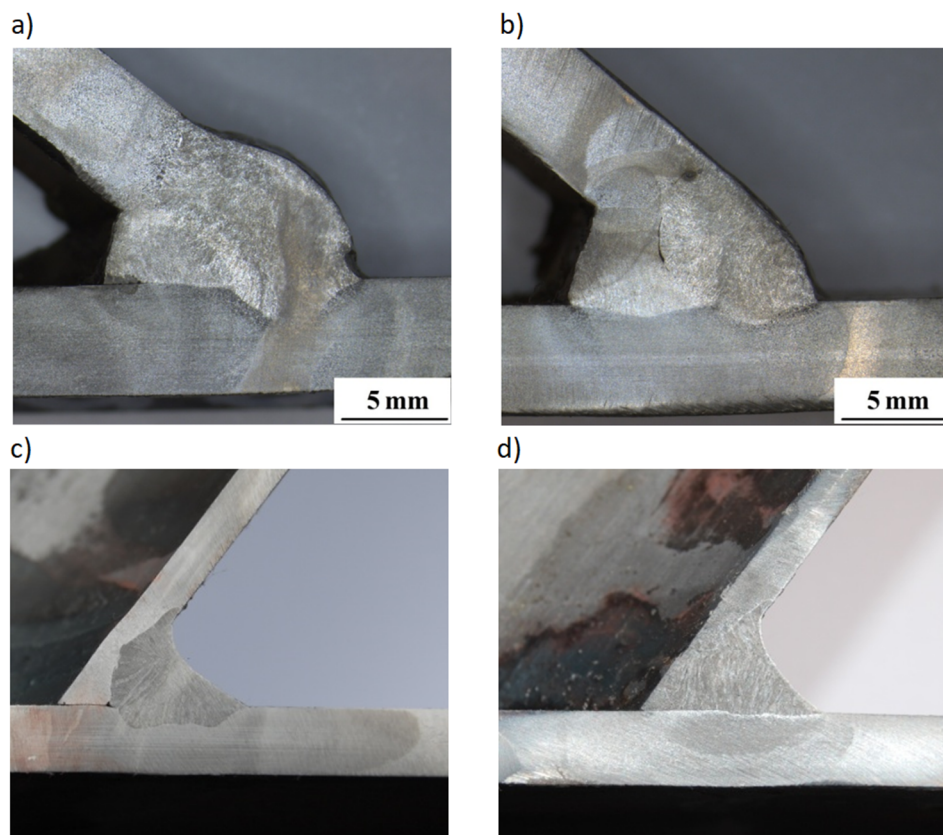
Welding imperfections detected in the pre-production joints. Description in the text
